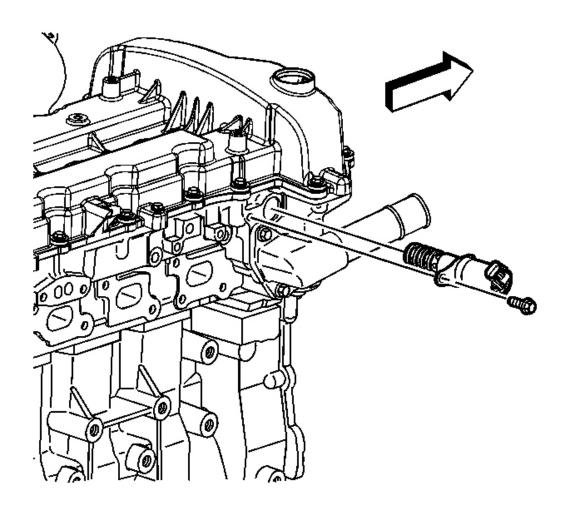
Identifying Camshaft Position Actuator Valve & Bolt Courtesy of GENERAL MOTORS CORP.
